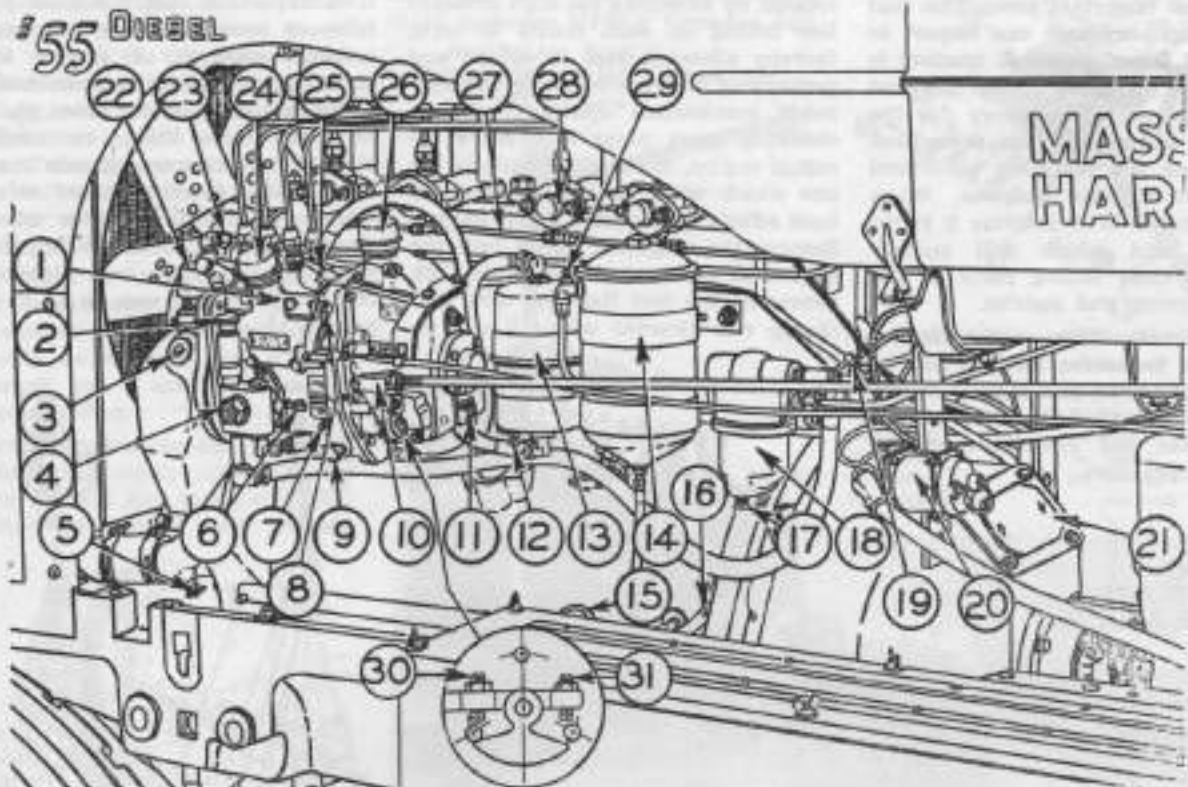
Bosch APE pump installation on Massey-Harris model 55 Diesel.
